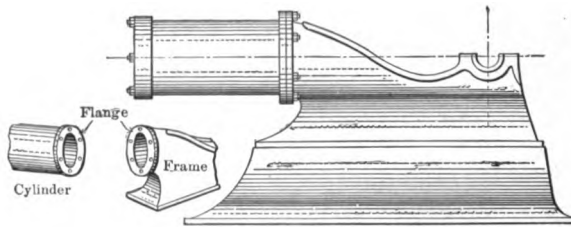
Flange Type, Cylinder Bolted onto Frame.
